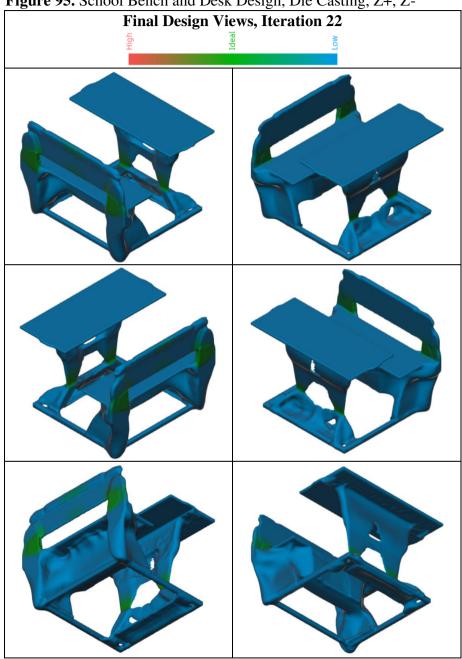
School Bench and Desk Design, Die Casting, Z+, Z-
